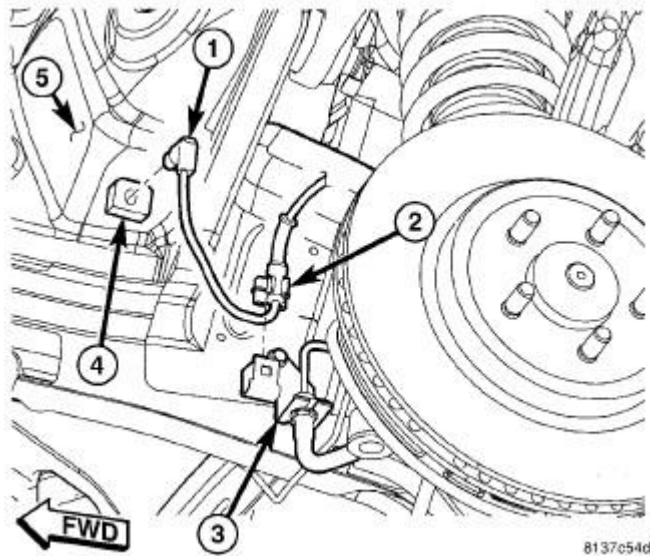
WHEEL SPEED SENSOR AT BODY CONNECTOR
